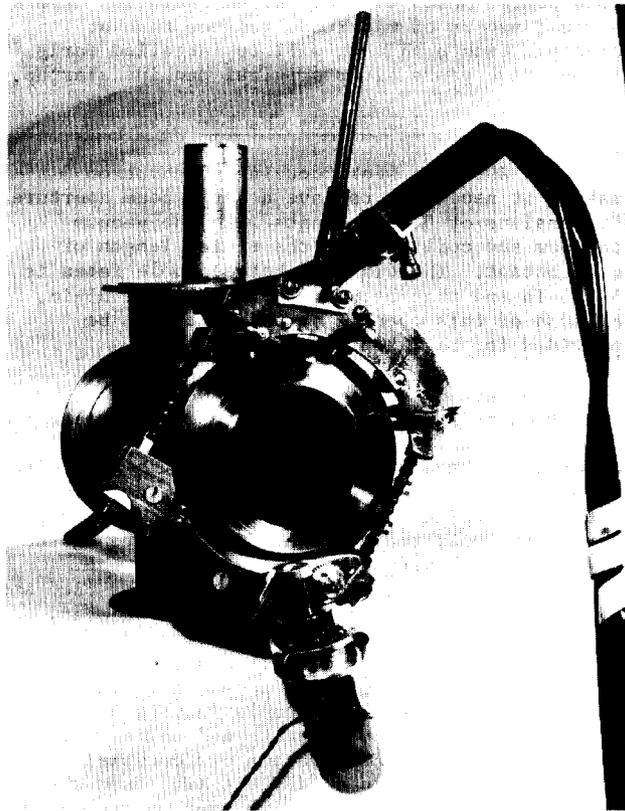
Automatic edge welding tool showing motor drive.
